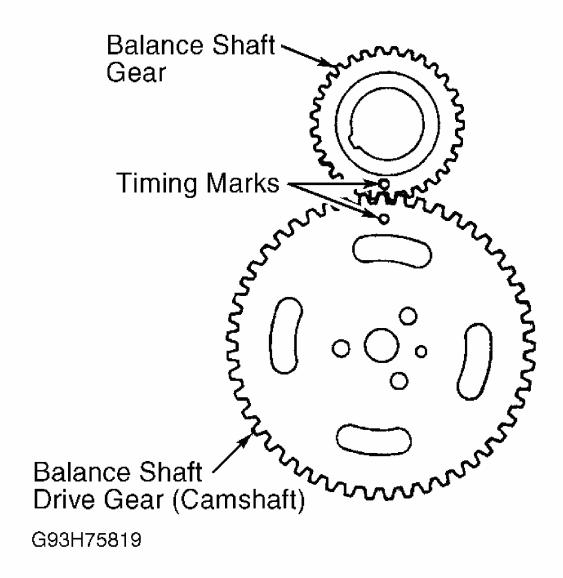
Aligning Timing Marks For Balance Shaft Gears Courtesy of GENERAL MOTORS CORP.
